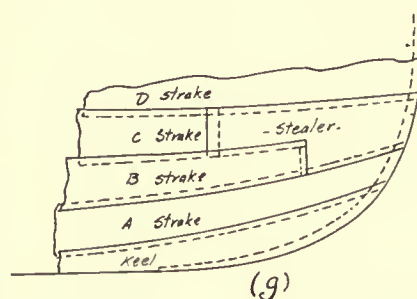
HOW STEALER PLATES ARE INTRODUCED.
